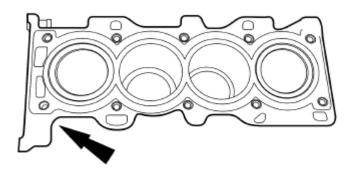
Locating Silicone Gasket And Sealant Applying Area Courtesy of FORD MOTOR CO.
